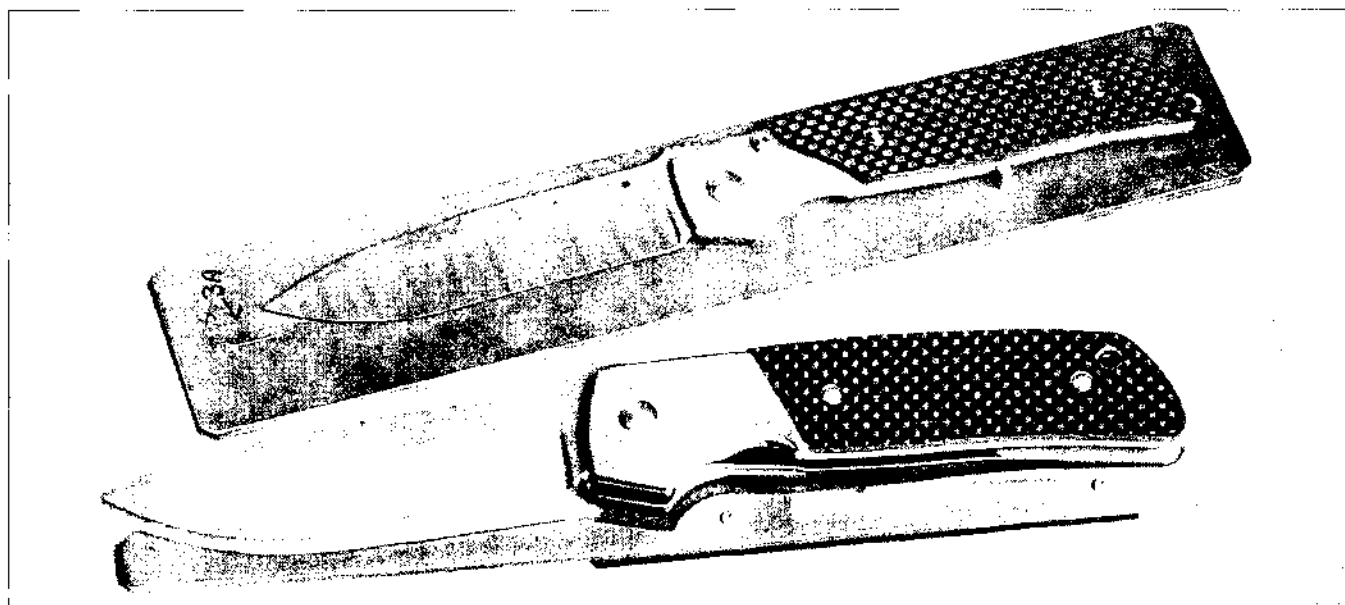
These are holding fixtures that are used while grinding my blade bevels.
